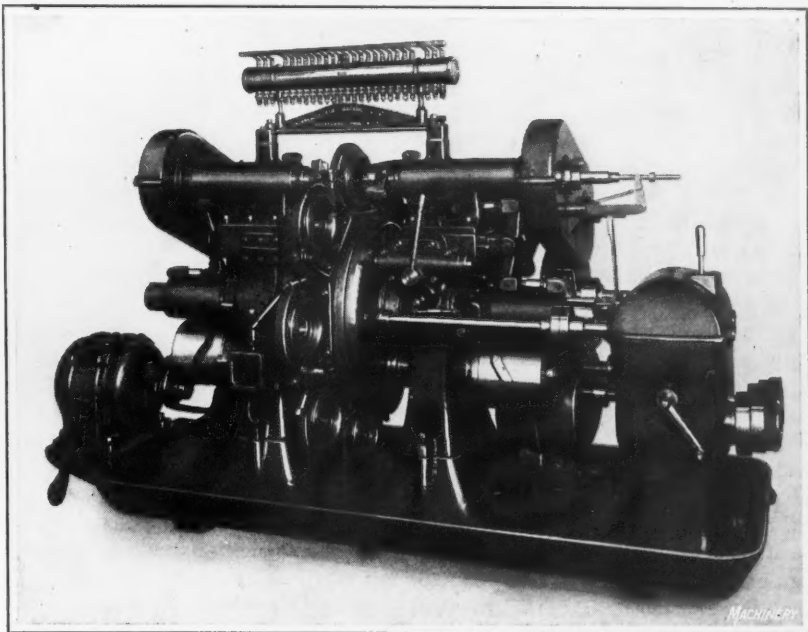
Duplex Multi-spindle Turret Machine made by the Blomquist-Eck Machine Co.
